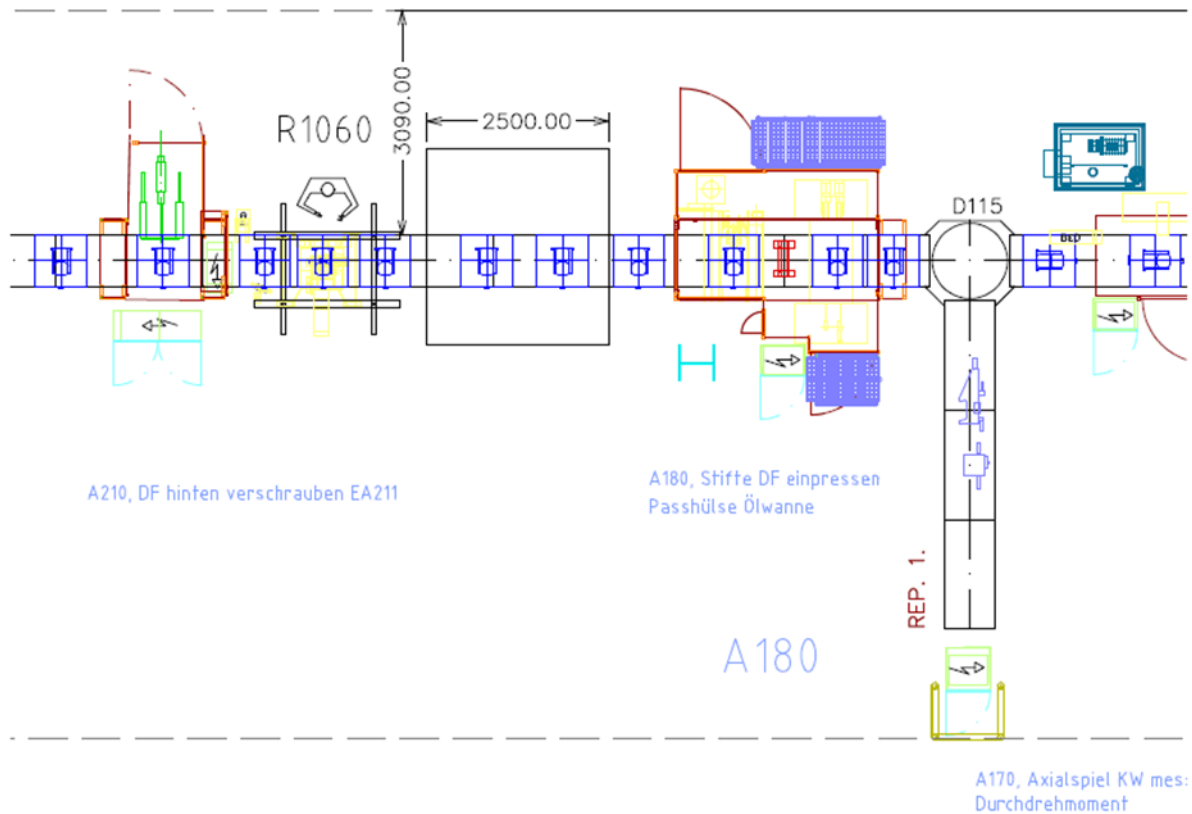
Floorplan - Station R1060 Sealing Flange (Szabo, 2016)
